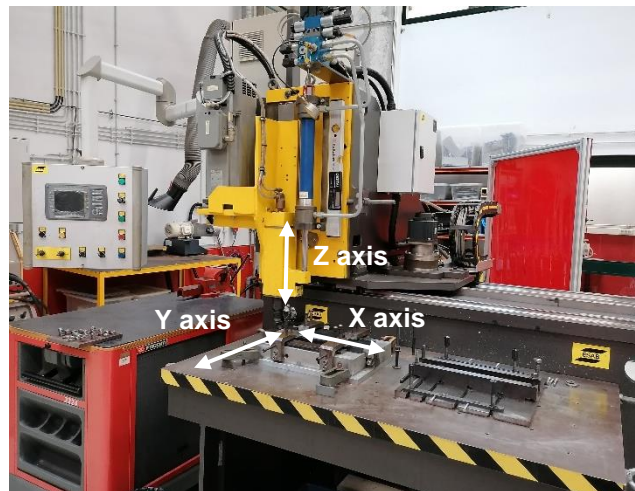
FSW ESAB® Legio 3UL numeric control machine.
